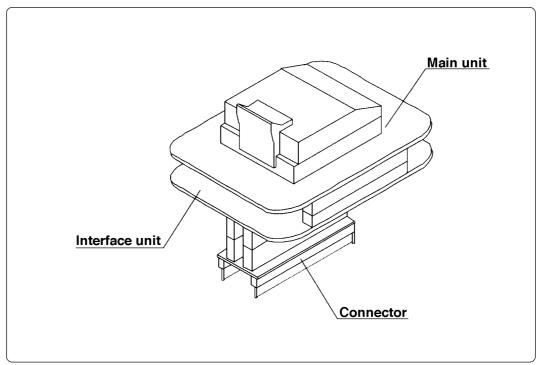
External view and constituent parts (IC socket: QFP type)
